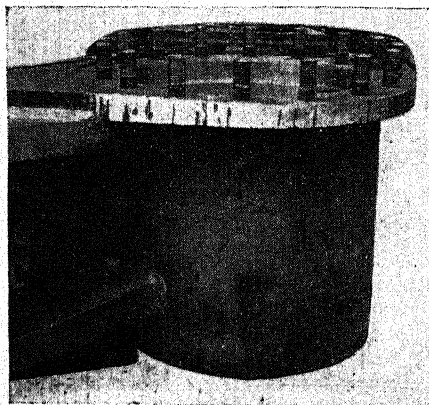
Cylinder of jack unit welded to frame and machined.
